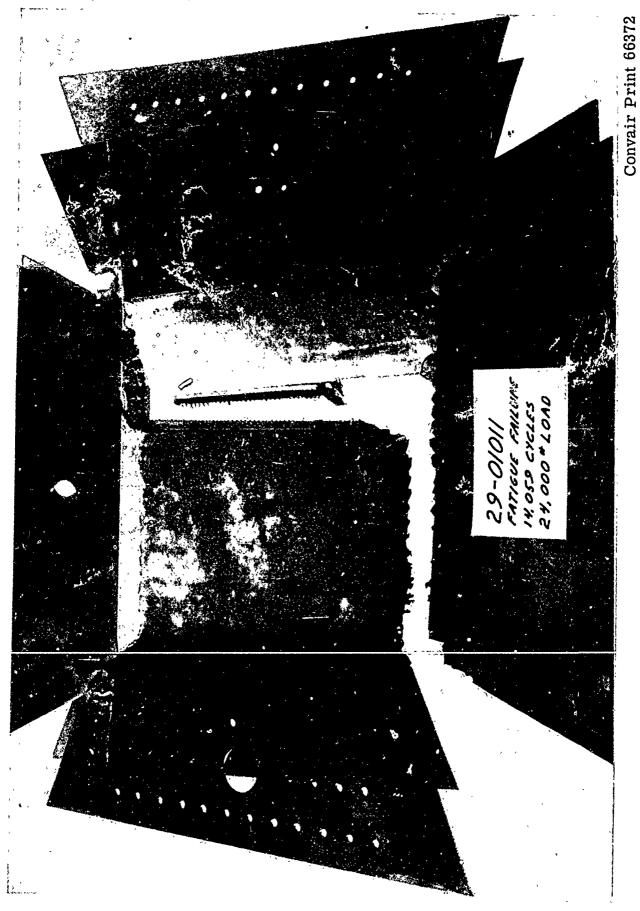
FATIGUE FAILURE OF TEST PANEL 29-01010-5.
